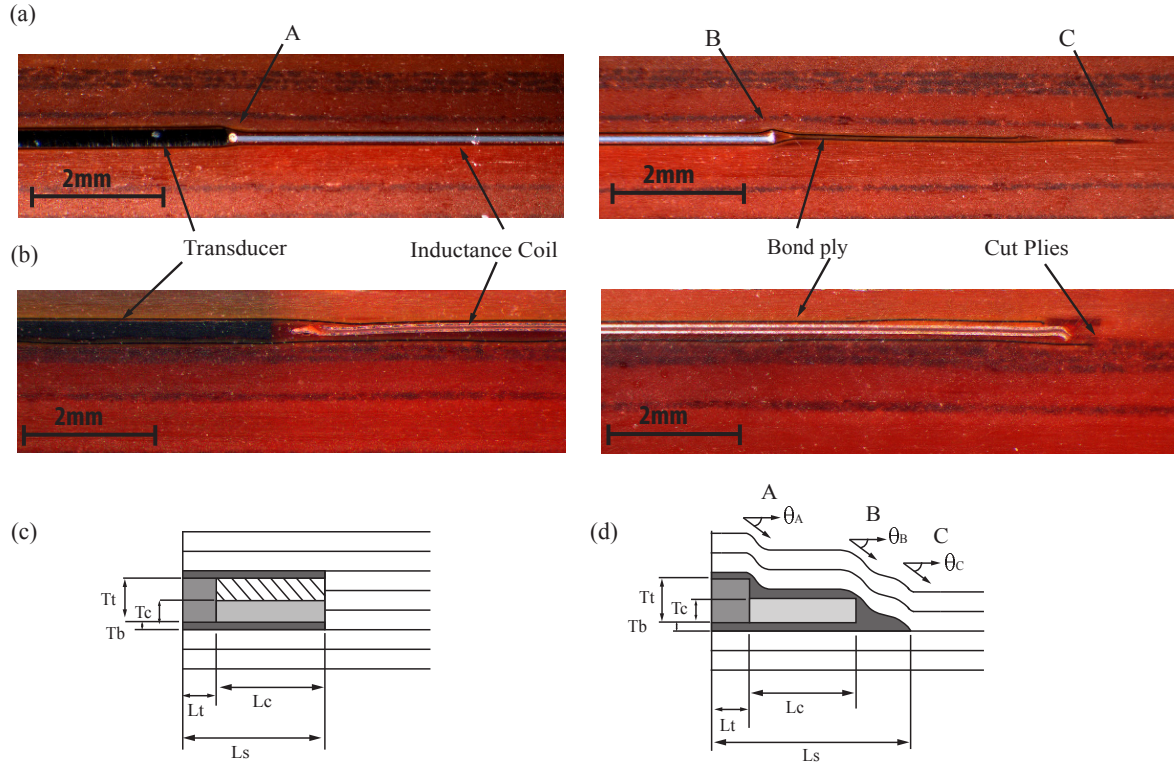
a) Sensor embedded using the forming technique. b) Sensor embedded using the cut ply method. c) Idealised cut ply sensor geometry. d) Idealised formed sensor geometry.
